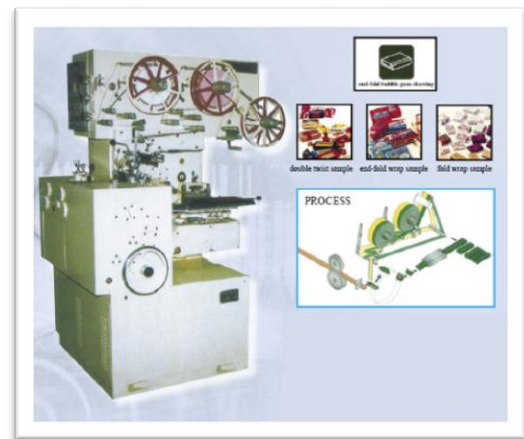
Linhandle LC-128 Forming, Cutting and Wrapping Machine²
